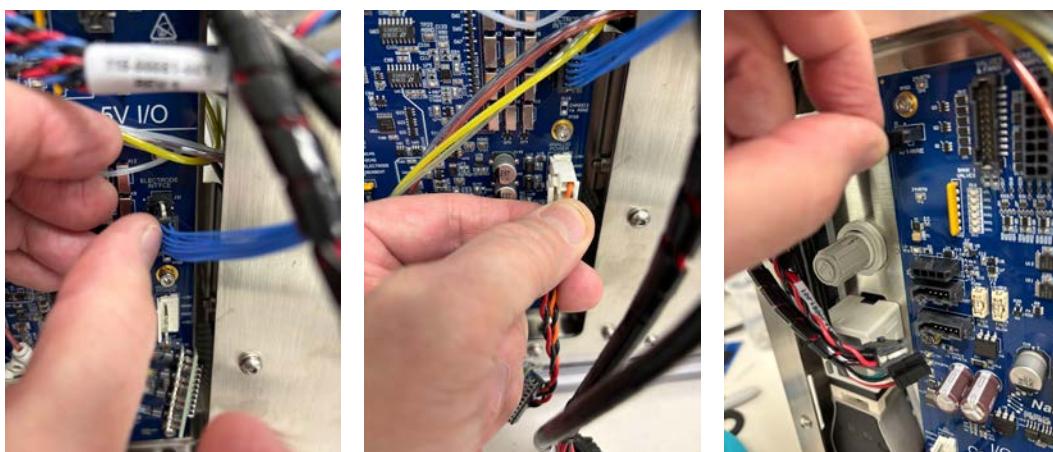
Installing the I/O PCB electrode connector (left), analog power connector (middle), and 1-wire connector (right).
